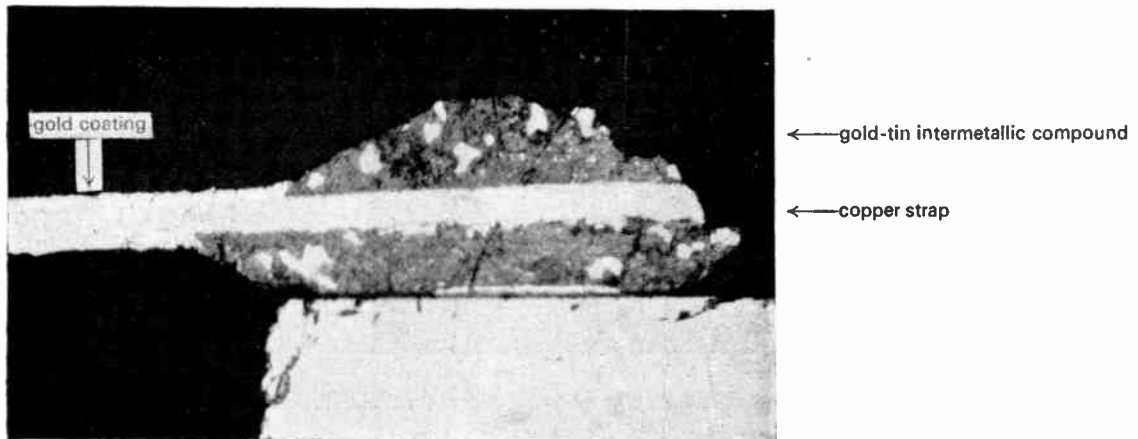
Gold-plated strap to chip pad solder joint ($\times 420$).
